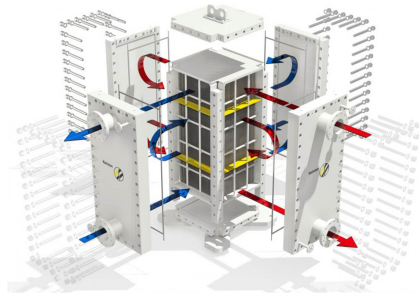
Exploded view of a fully welded plate heat exchanger [42]
